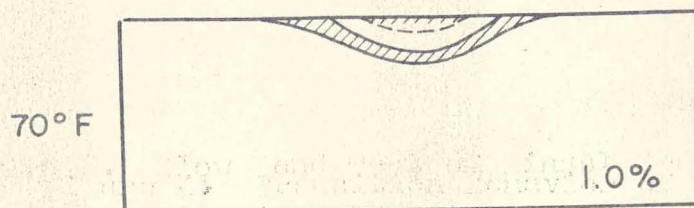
Drawing Illustrating Fracture Pattern of Figure 5.
